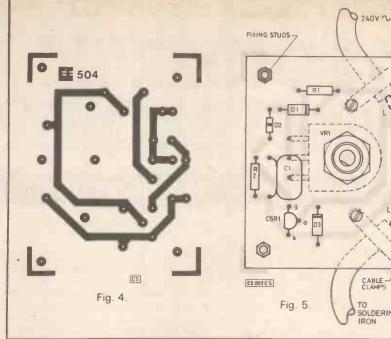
(above) P.c.b. pattern for the Soldering Iron Power Controller.
